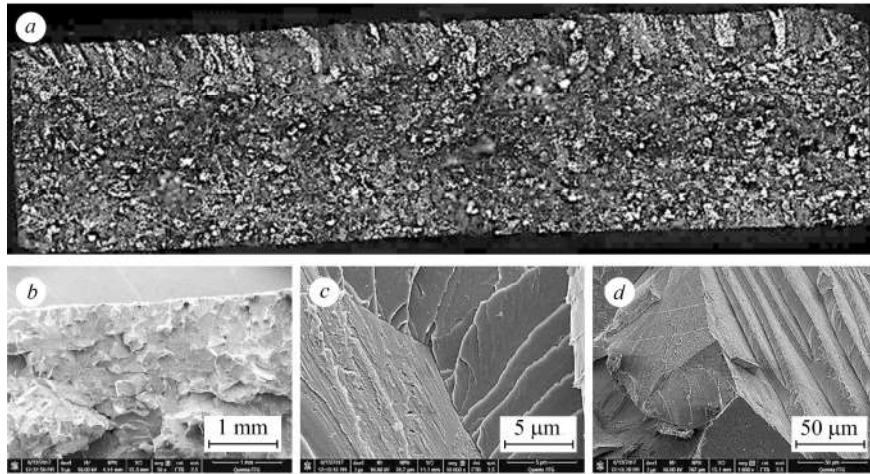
Structure of fracture surface of the ferritic steel weld made with the MAG method
